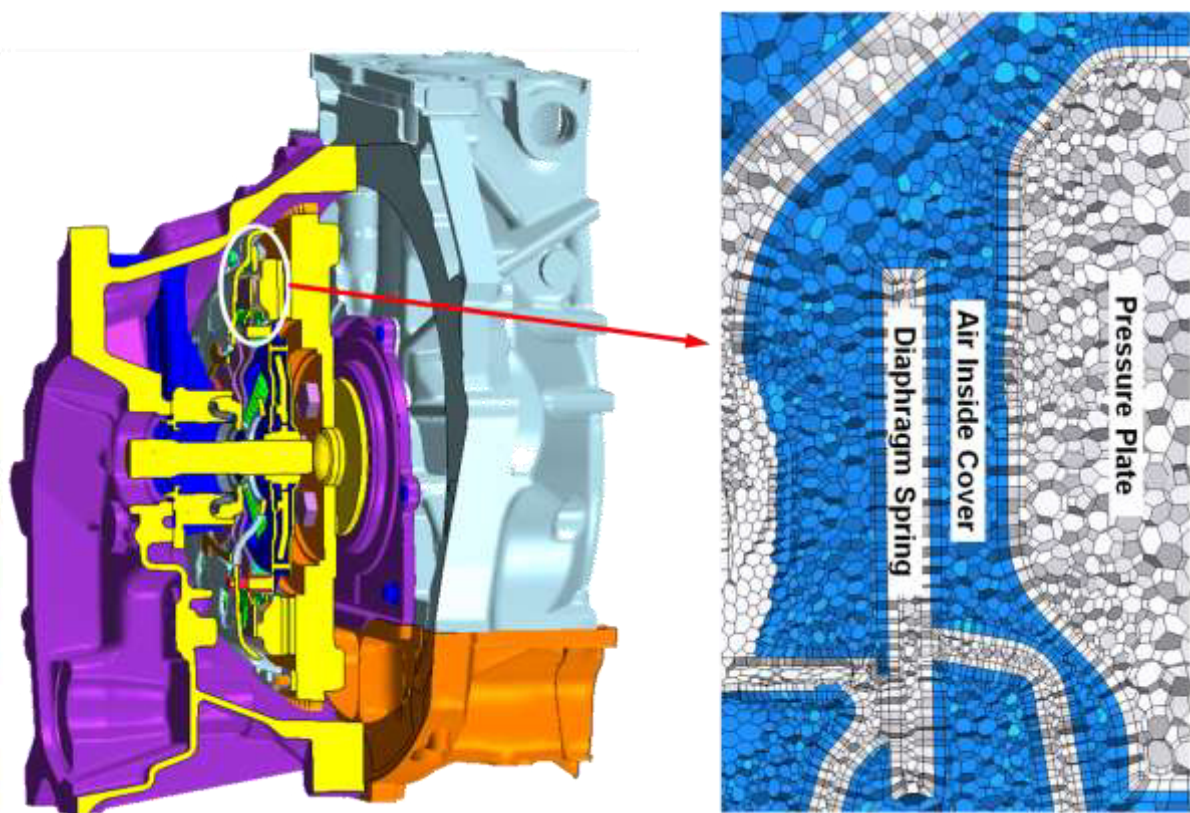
Mesh Structure inside the Pressure Plate Assembly
